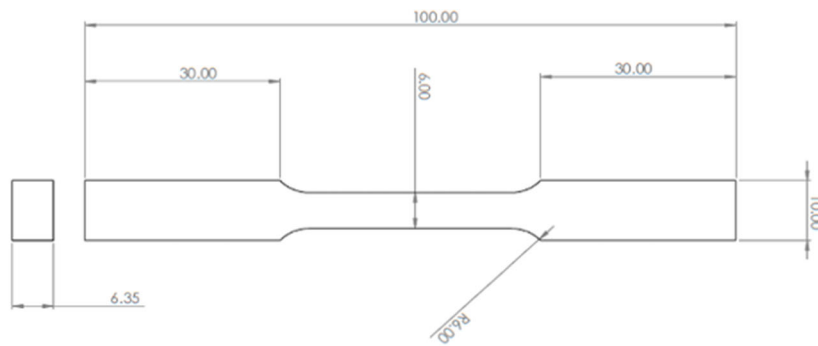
2: Dimensions of tensile tests specimen (All dimensions are in mm)
